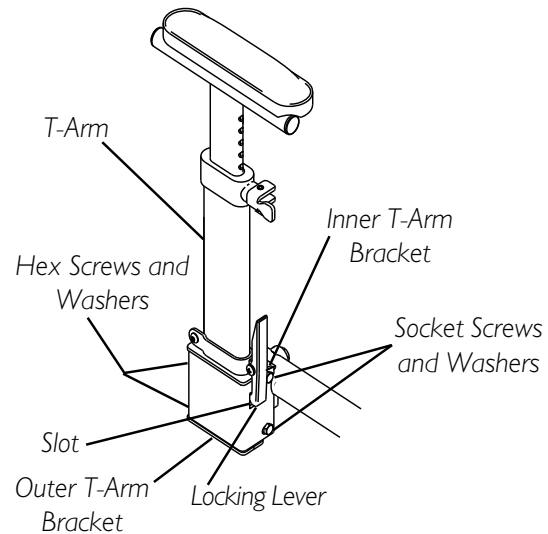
ADJUSTING T-ARM SOCKETS
